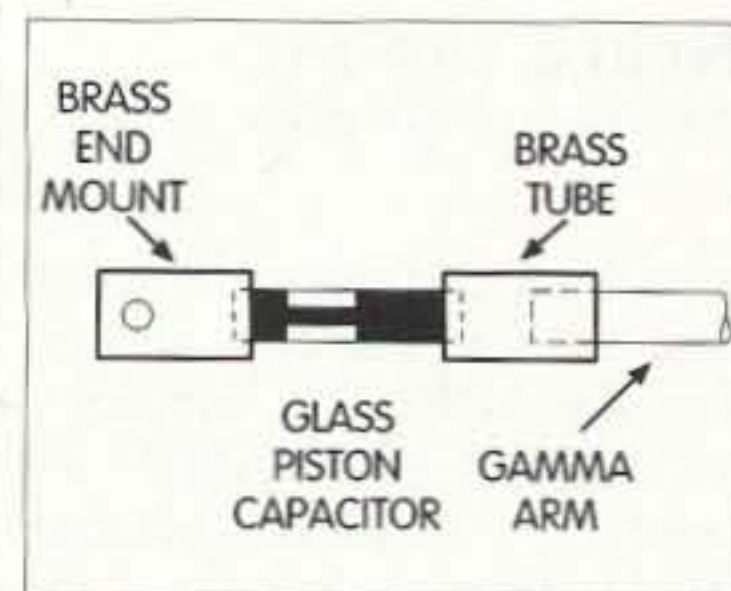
The first attempt at constructing the gamma match section with a glass piston capacitor soldered to small sections of brass tubing for connections to the mounting insulator and gamma aluminum rod.
